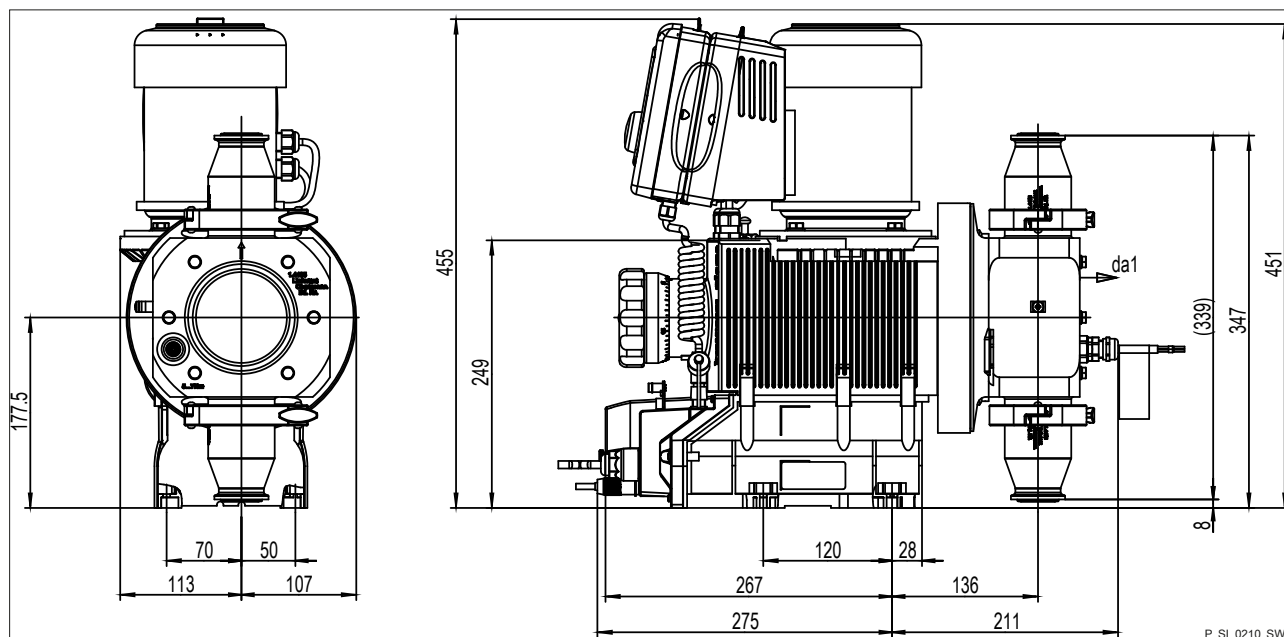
Dimensional drawing of the Sigma 3, S3CB with hygienic pump head DN25, dimensions in mm
